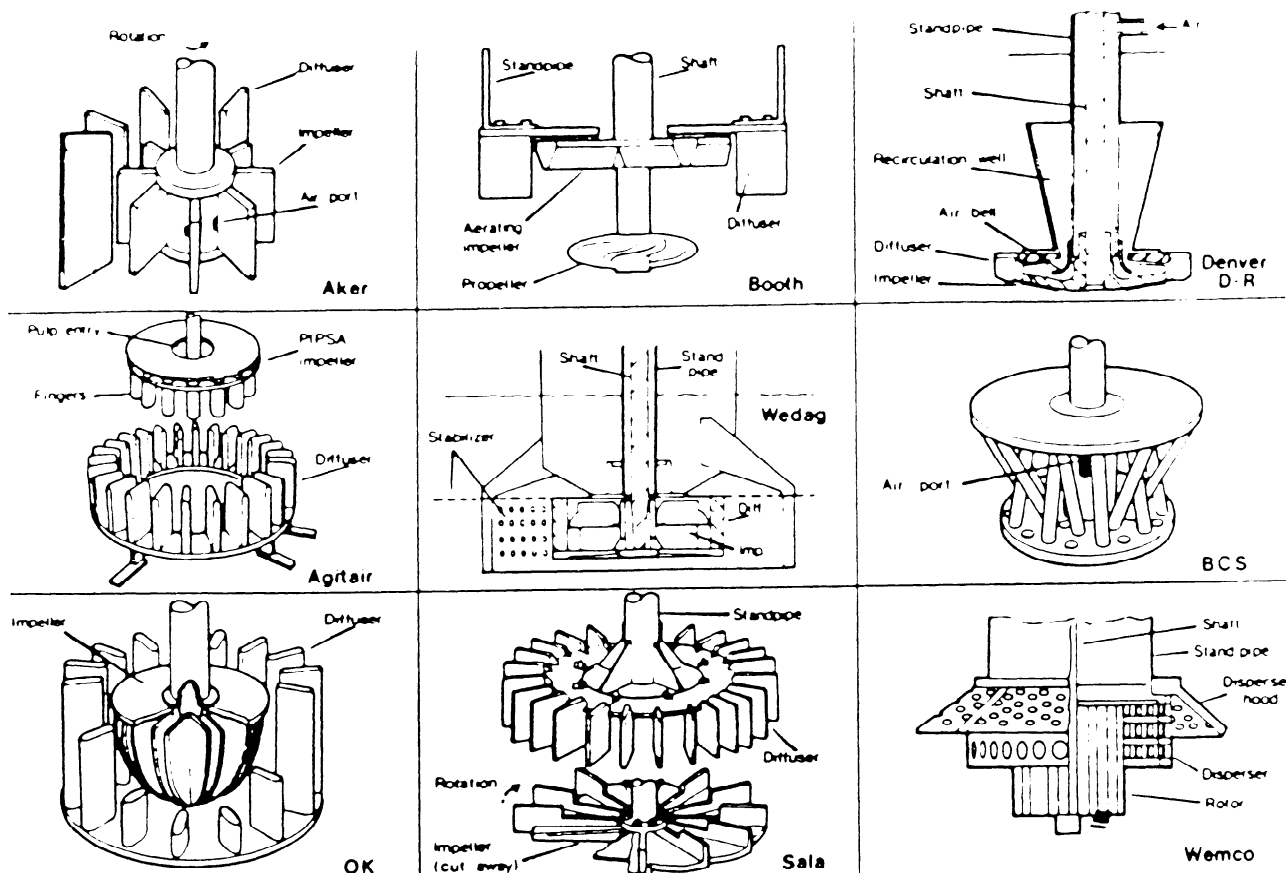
Impeller mechanism details of open-flow machines (Young, 1982).
